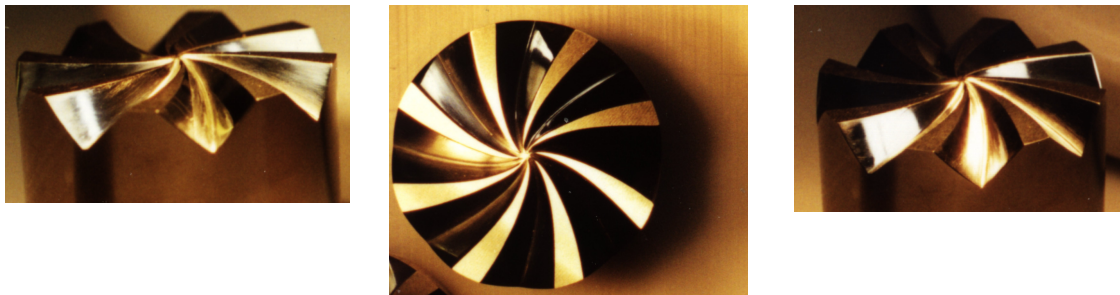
Photographs of 20g batch HSM laboratory machine rotor
